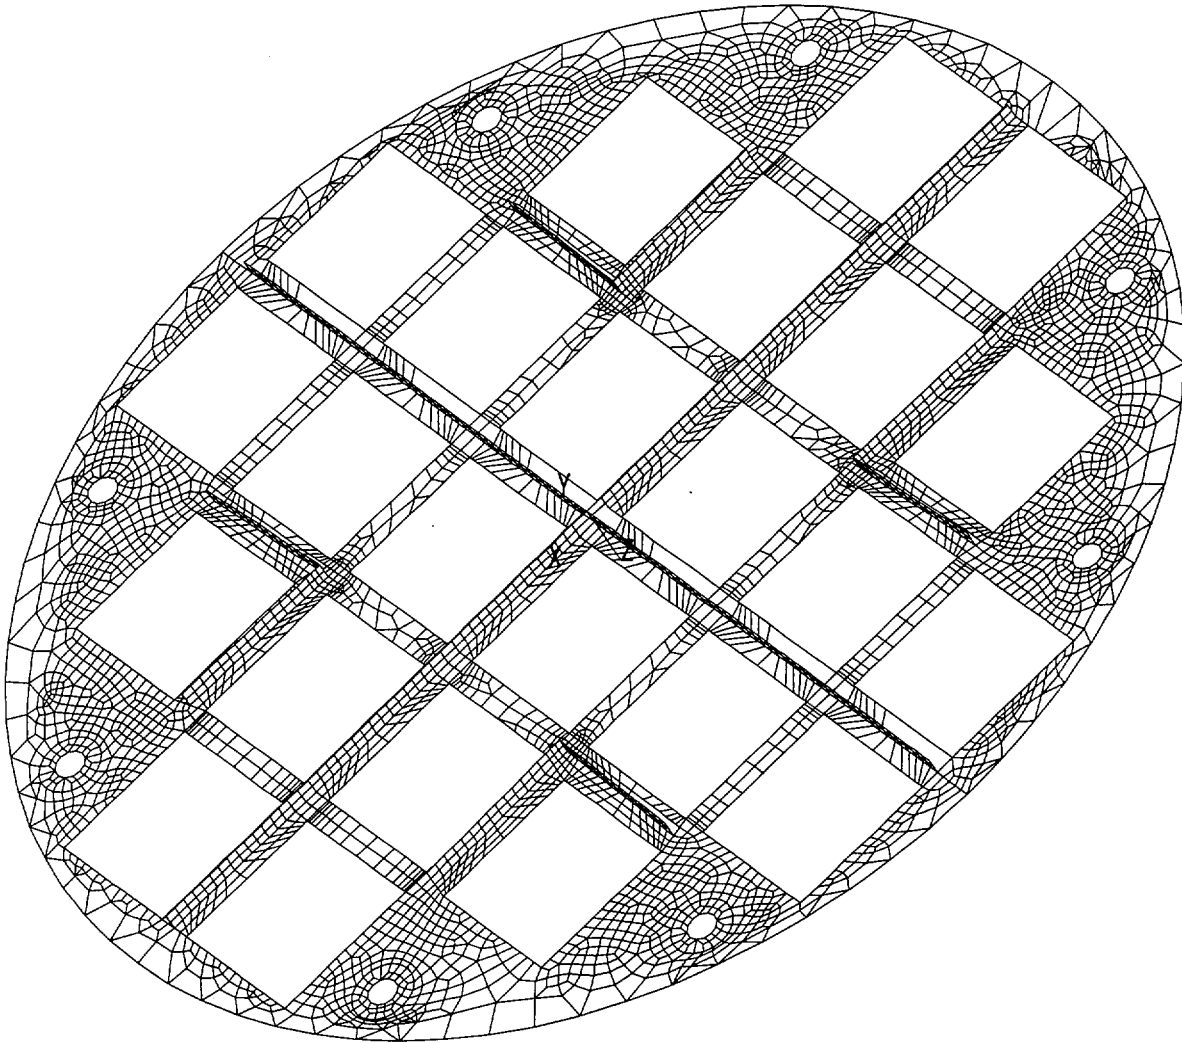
PWR Bottom Weldment Plate Finite Element Model
